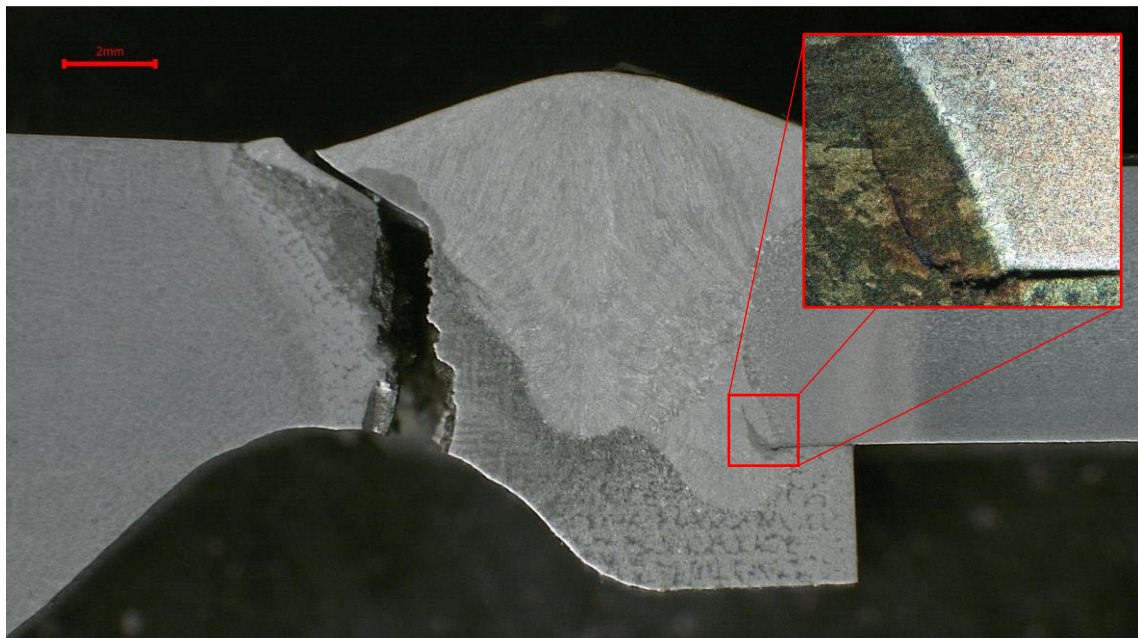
Fracture sample from specimen 96G26_FA8 with a 1.1 mm long crack in the weld root.
